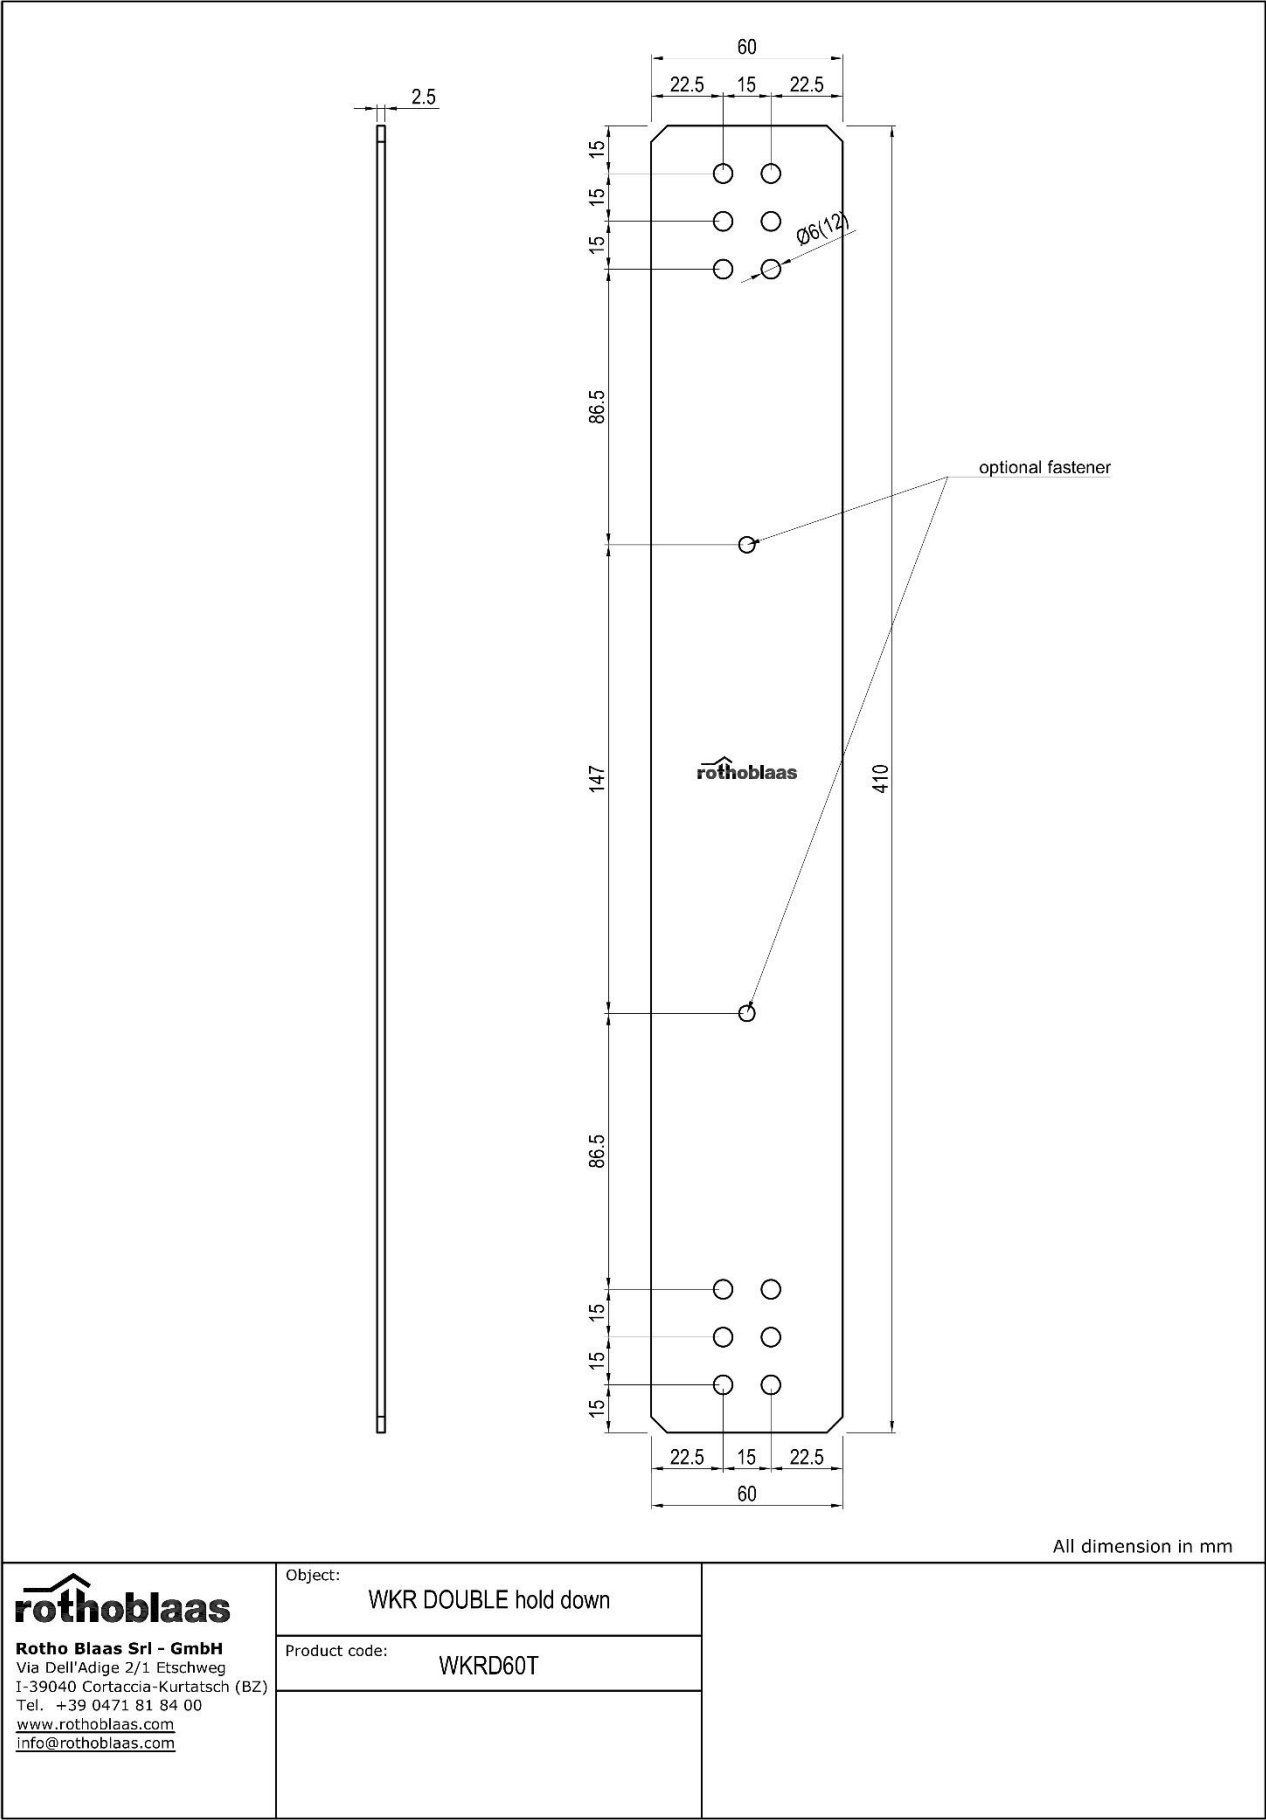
Dimensions of Rotho Blaas WKRD60T
